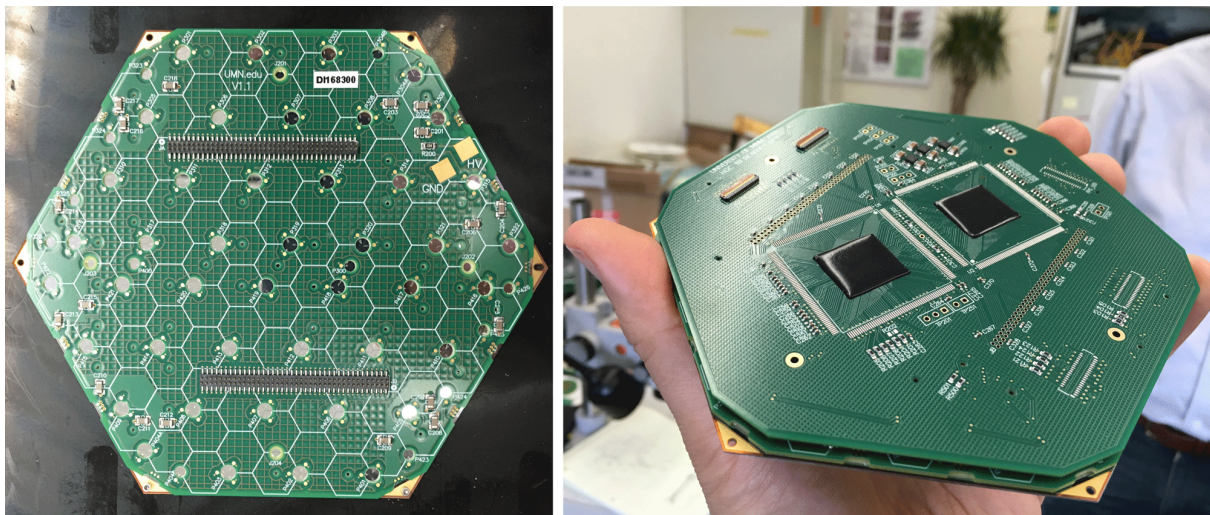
Left: a photo of the assembled 2016 bare silicon module showing the PCB with connectors and holes for wire bonds. The polyimide layer is visible at the corners, where there are also holes through the module for attaching it to a support (cooling) plate. Right: a complete HGCal module, showing the readout PCB with two wire-bonded SKIROC2 bare-die ASICs (under protective black encapsulant material.)
